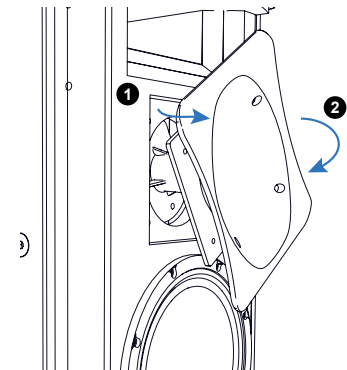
Pull the horn forward and rotate it 90° and realign holes
